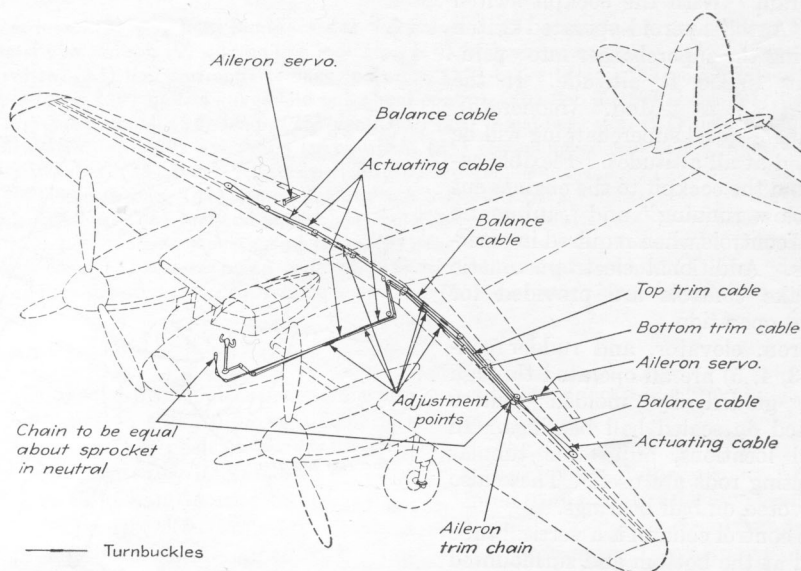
The aileron controls are operated by cables over ball-bearing pulleys. The right-hand tab is adjustable in flight; the left-hand one is adjustable only on the ground.
